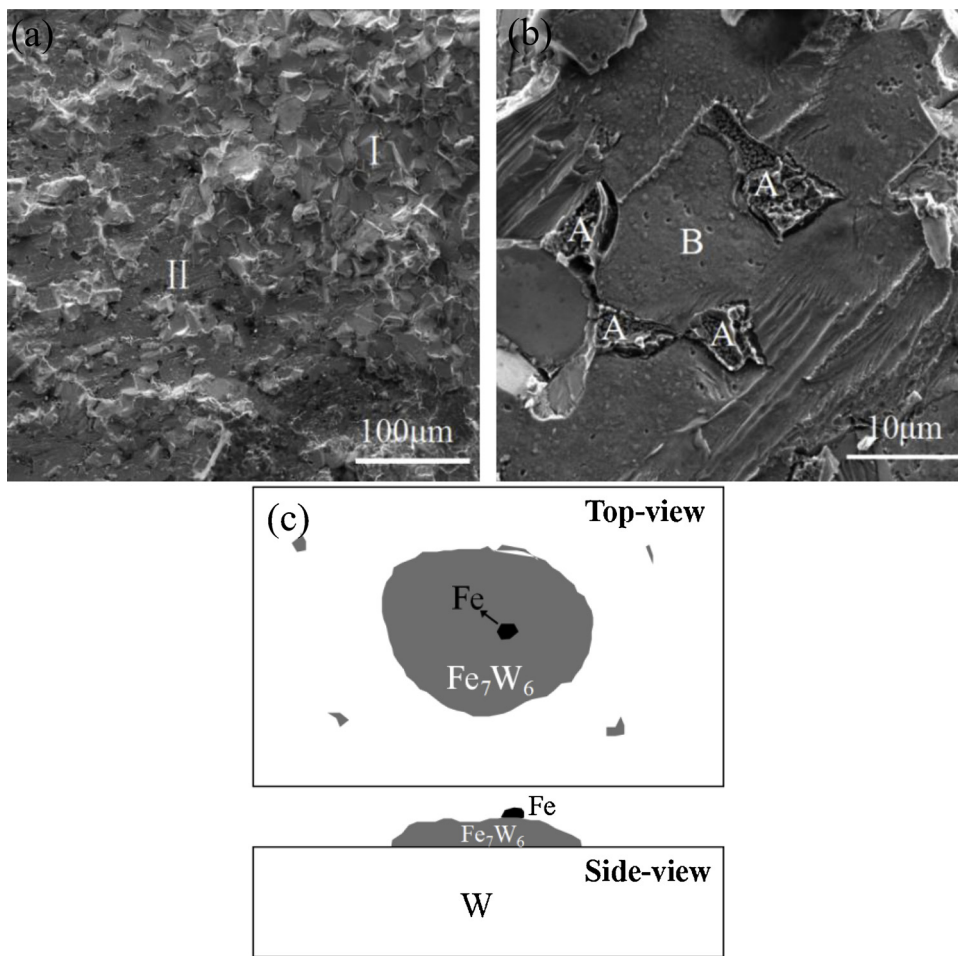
Fracture surface of the W-Ni-Fe/steel joint after tensile test. (a) representative fractured surface, (b) fracture surface of region II. (c) schematic of fracture morphology.
